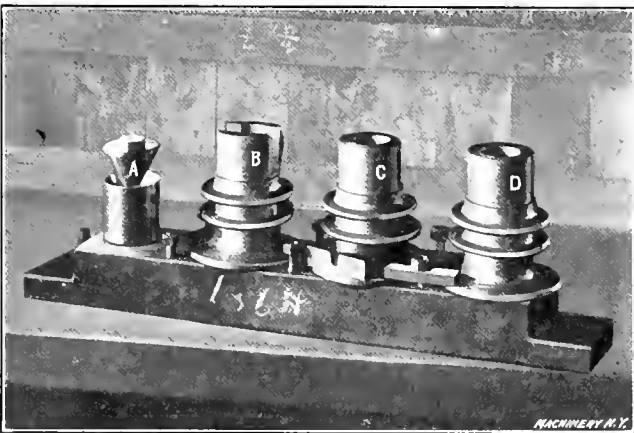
Milling Fixture in which Work is held on Expanding Plugs
